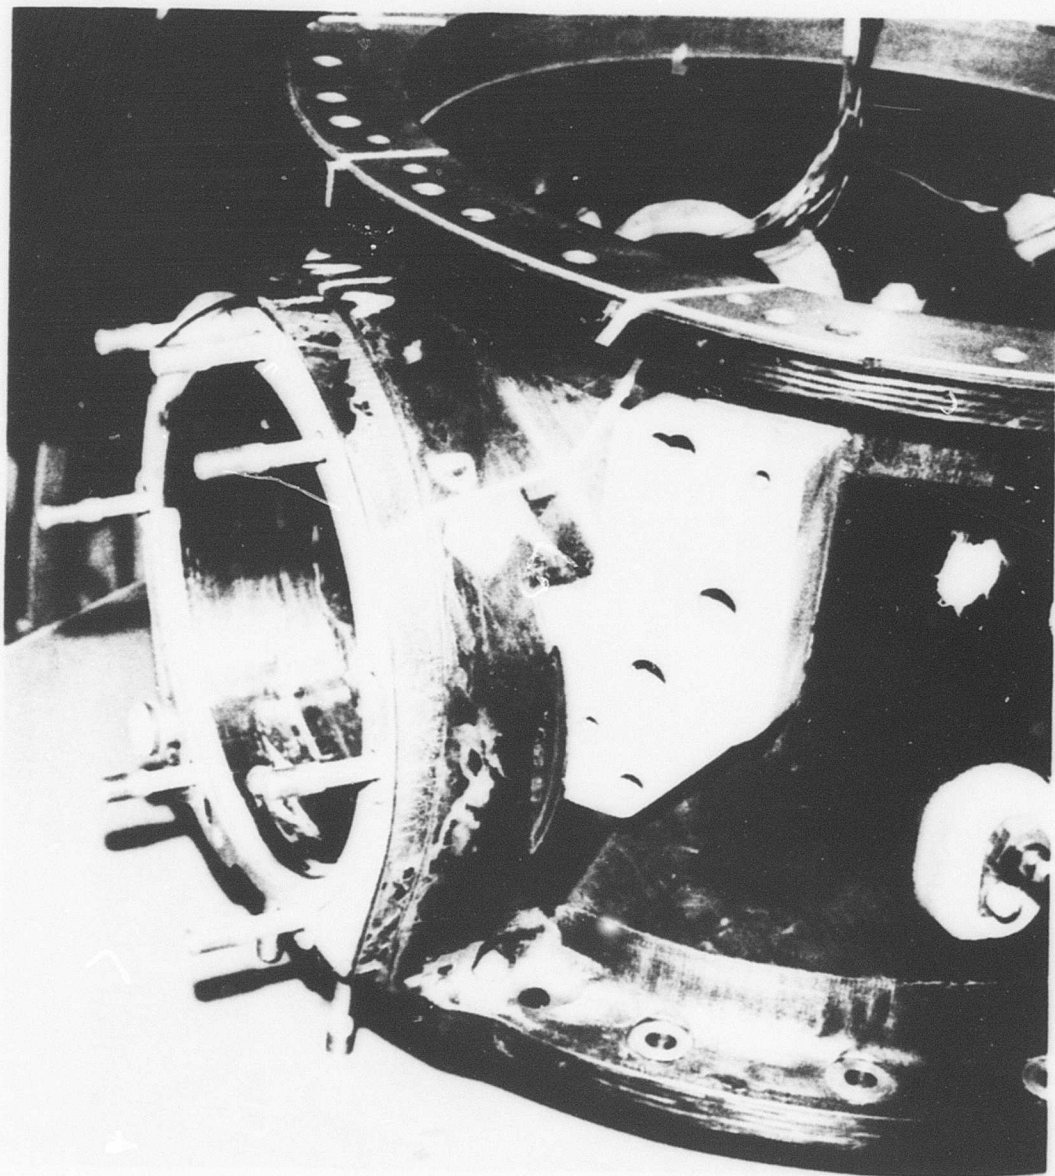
Side View of Failure Showing Bearing Ring Pulled Away From Body of Housing.
